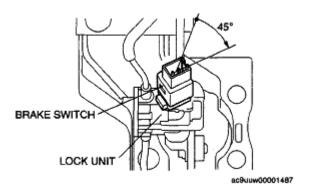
Identifying Brake Switch & Lock Nut Courtesy of MAZDA MOTORS CORP.
